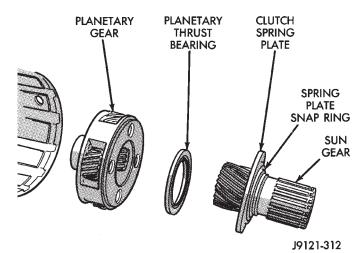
Removing Sun Gear, Thrust Bearing And Planetary Gear
